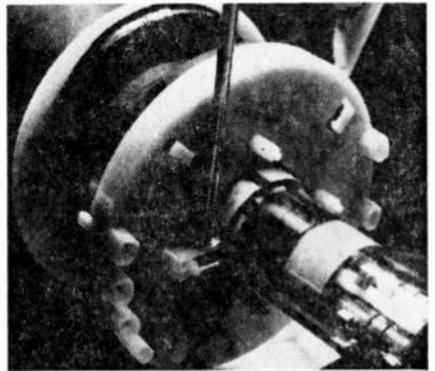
(above) After yoke assembly has been loosened with nutdriver it can be removed. Assembly is quite heavy—don't drop it.
